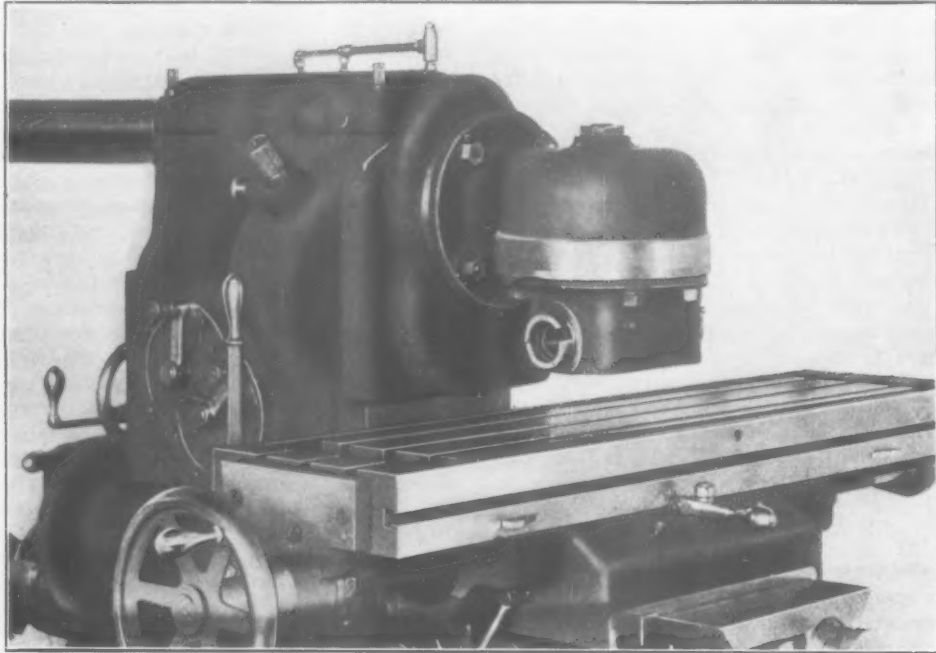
The New Milwaukee Universal Milling Attachment Made by the Kearney & Trecker Company, Milwaukee, Wis.
